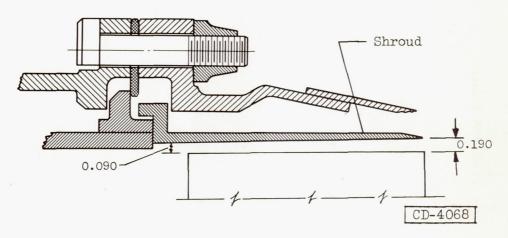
Conical flow fuel nozzle installed in engine combustion chamber.
